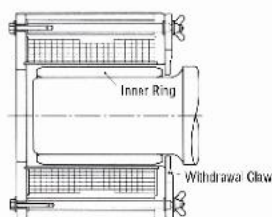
Removal of Inner Ring Using Induction Heater
